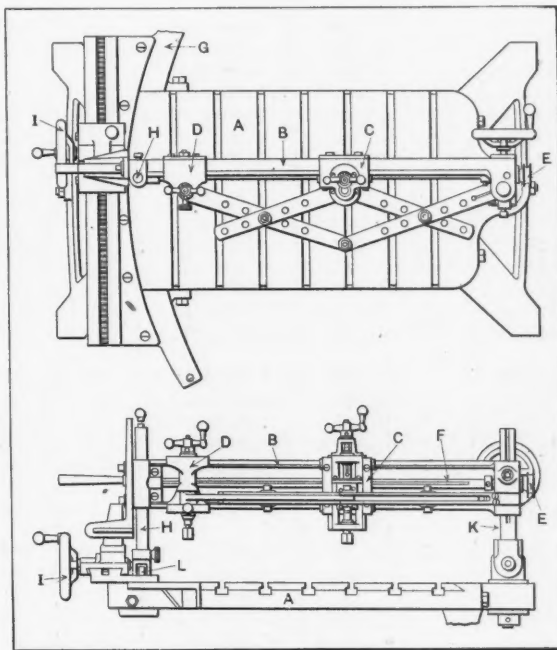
Engraving and Die-sinking Machine of Pantograph Type
